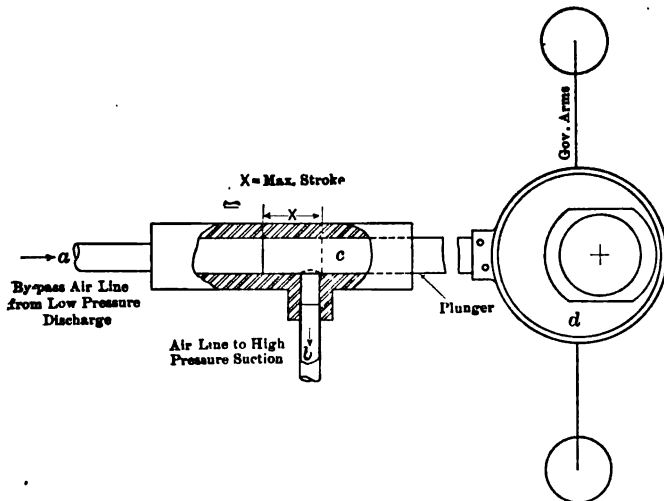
Standard Fuel Oil engine injection air pressure control.
